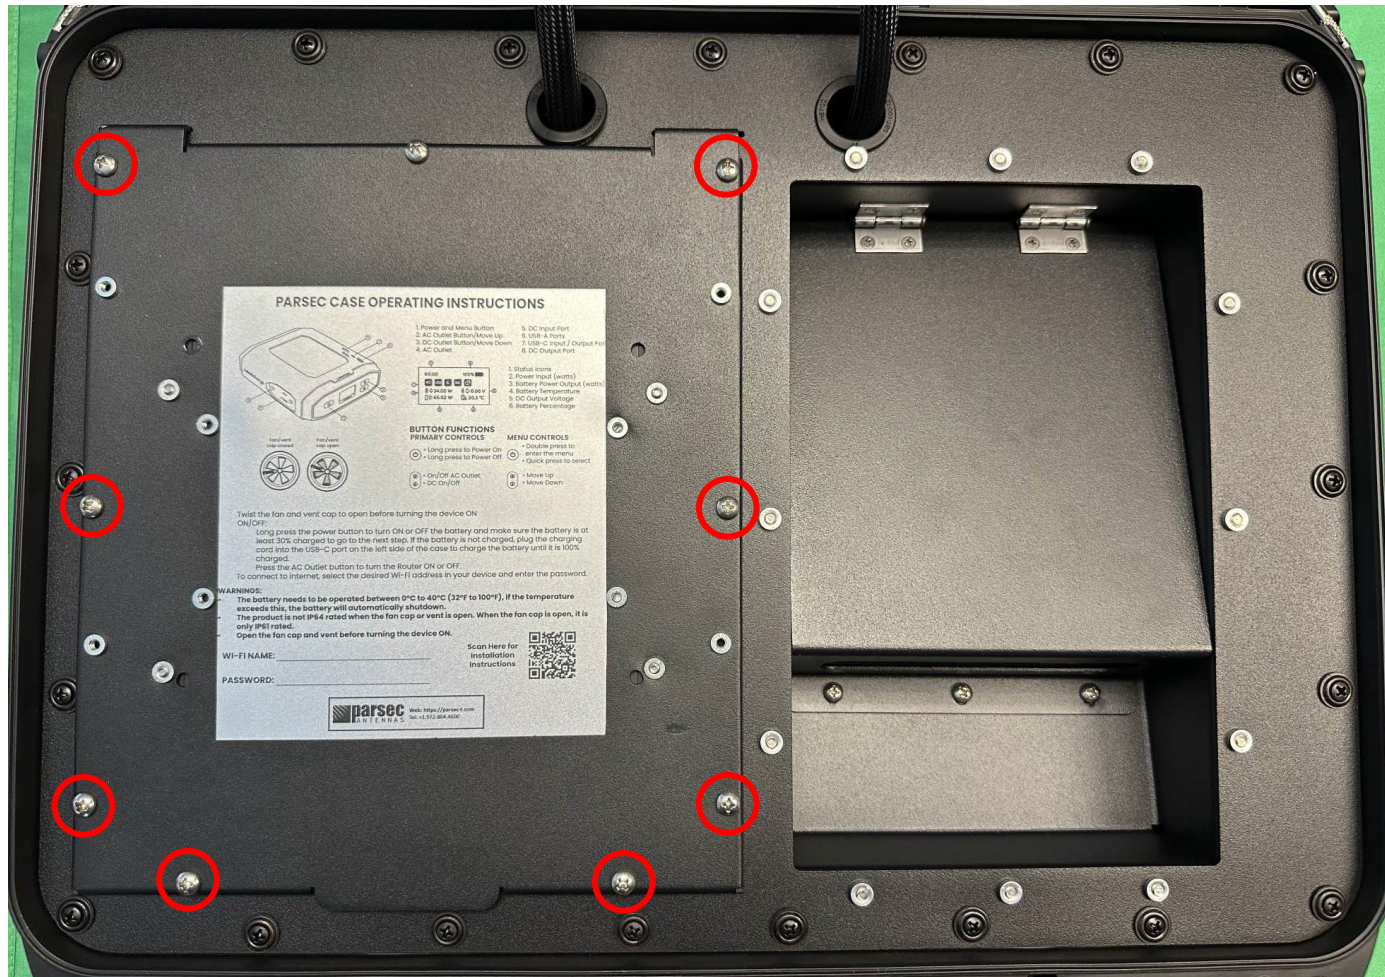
Fasten the router plate to the cover plate using PTA0164 screws.
